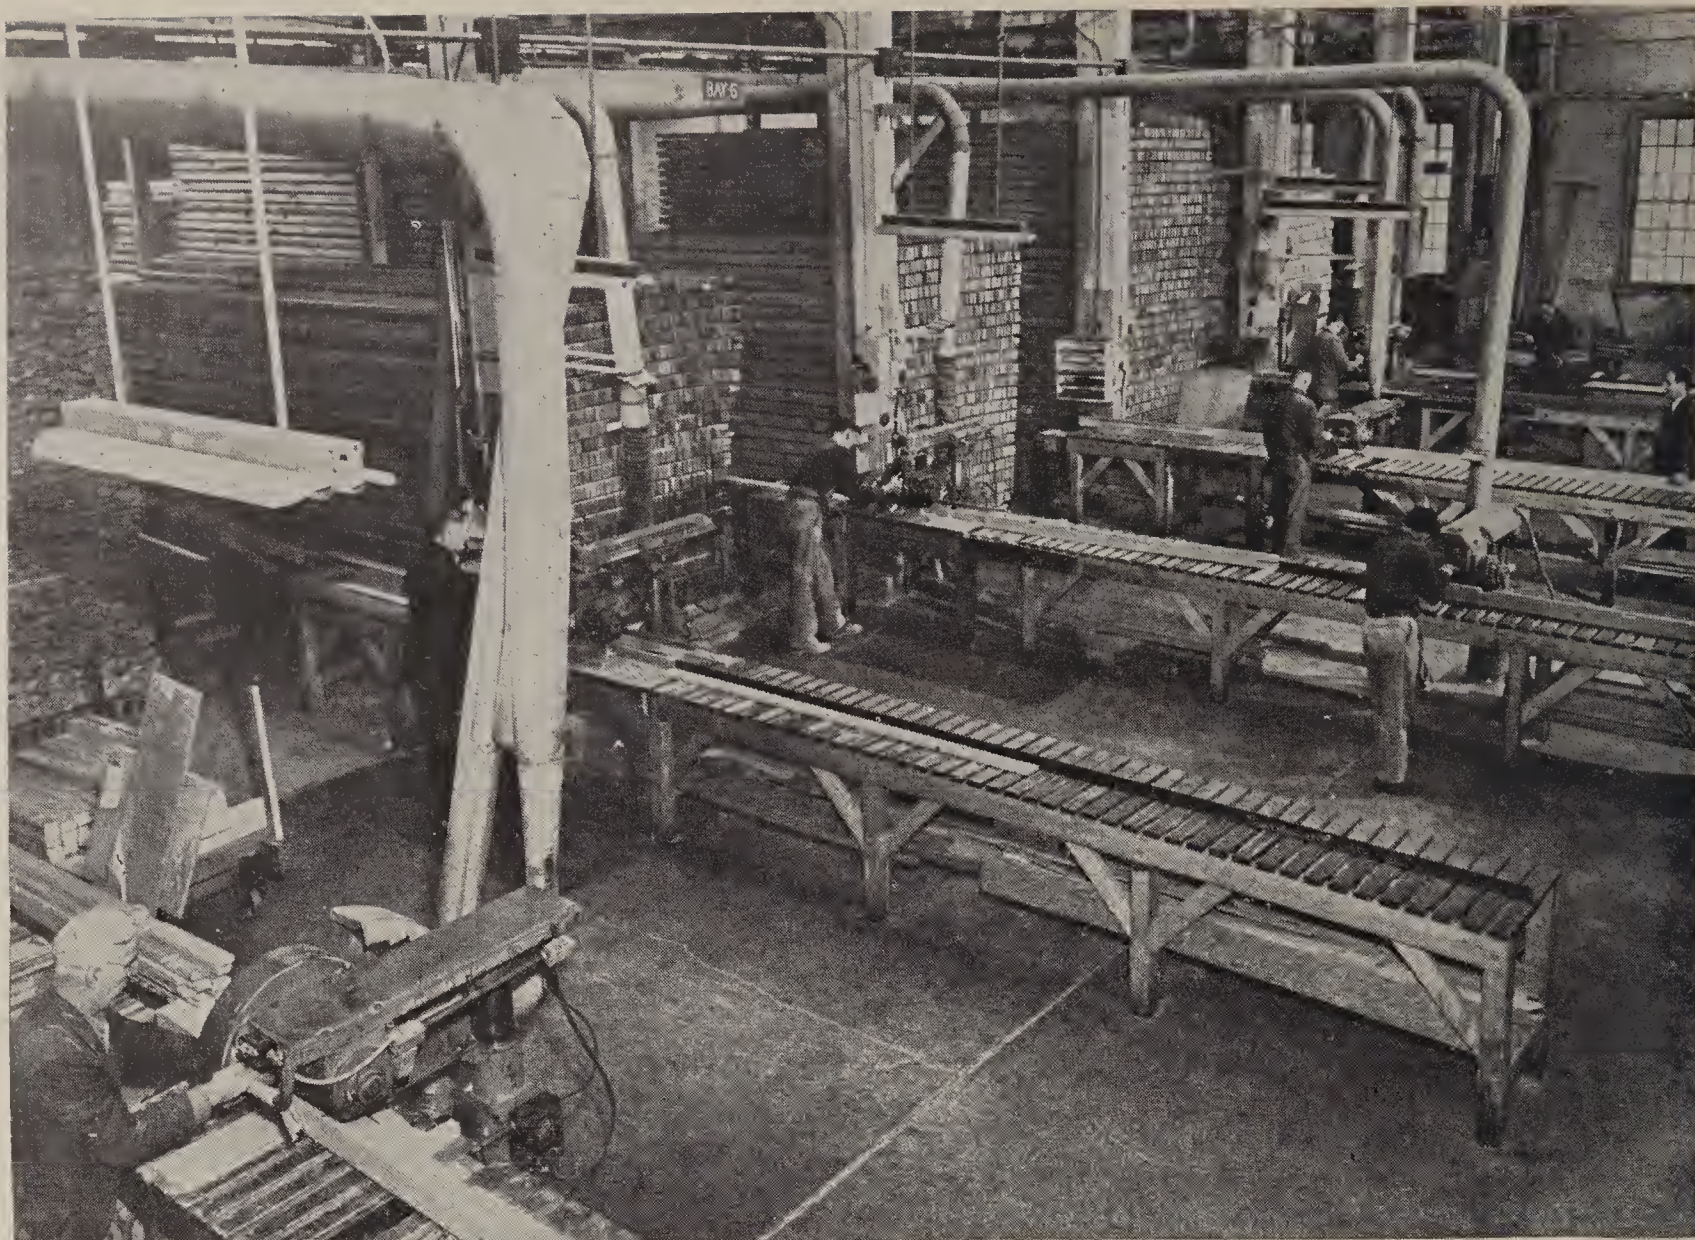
Cutting gains in framing members of prefabricated panels with a dado-head attachment on a cutoff saw.
